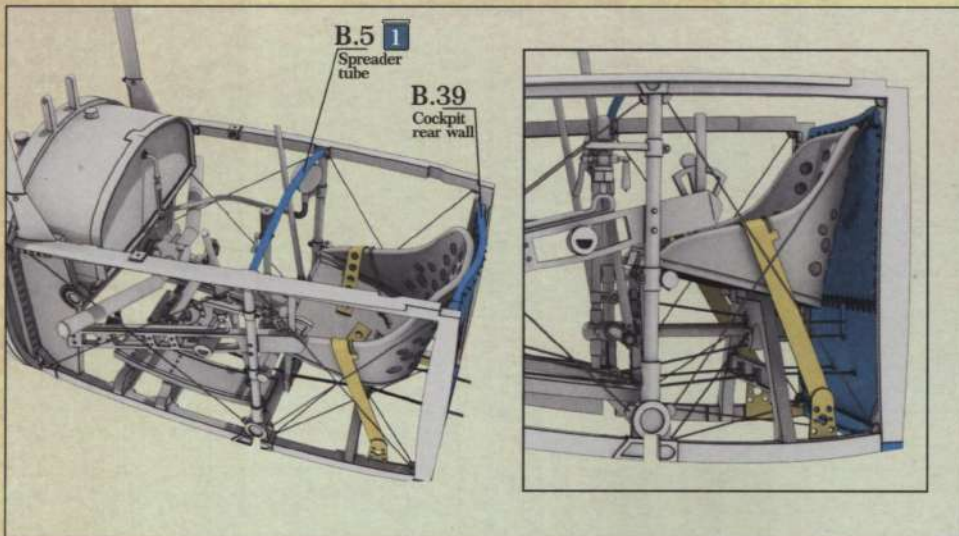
Check part alignment during assembly. Important: check the angle and position of the seat
